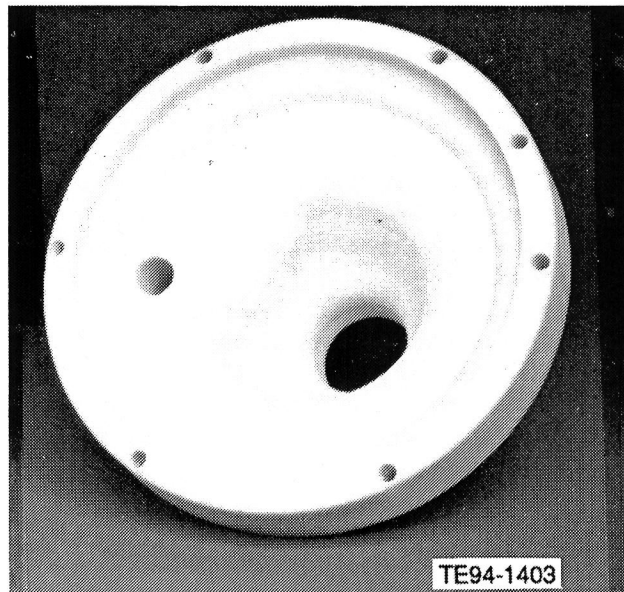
Gasifier housing insulation mandrel polycarbonate prototype (forward surface).
